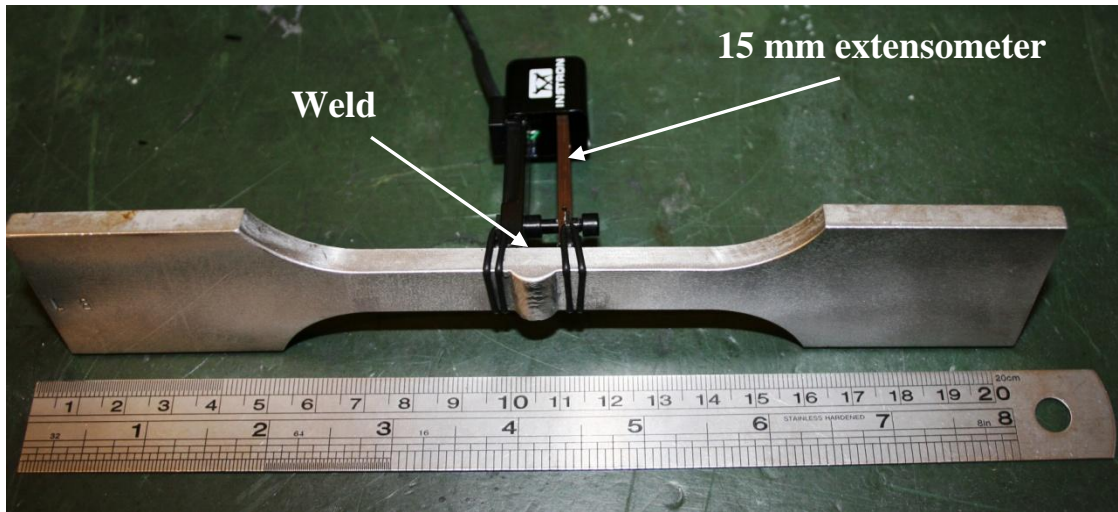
Machined welded test sample showing placement of extensometer
